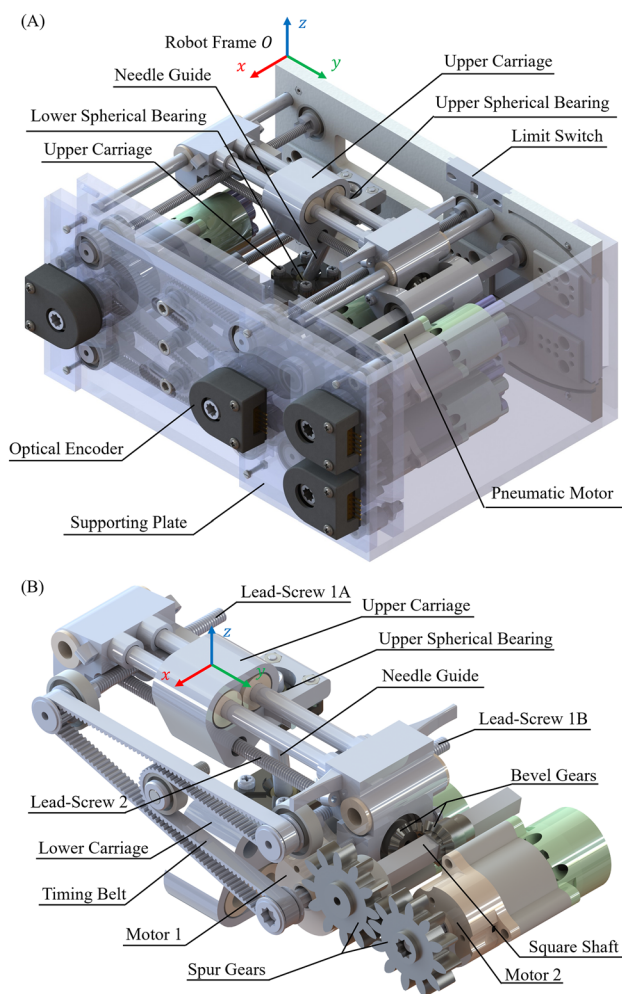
A Overall robot design: the robot is composed of the following key components: supporting plates, transmission system, actuating system (including pneumatic motors, optical encoders, and limit switches), and needle guide. B Upper motorized Cartesian stage transmission system design: The robot comprises two separate Cartesian stages for actuating the upper spherical bearing and the lower spherical bearing, respectively. The components highlighted in this figure collectively constitute the transmission subsystem that drives the upper Cartesian stage
